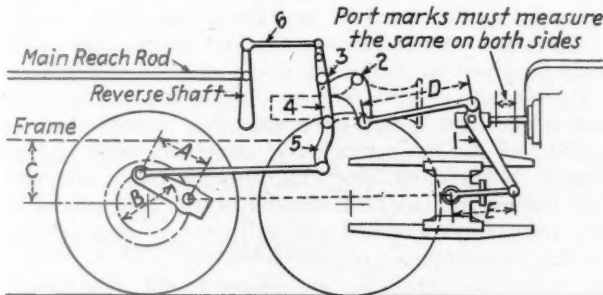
Assembly of Baker valve gear (1—Combination lever. 2—Bell crank. 3—Reverse yoke. 4—Radius bar. 5—Gear connecting rod. 6—Gear reach rod. Letters refer to Table II.)
